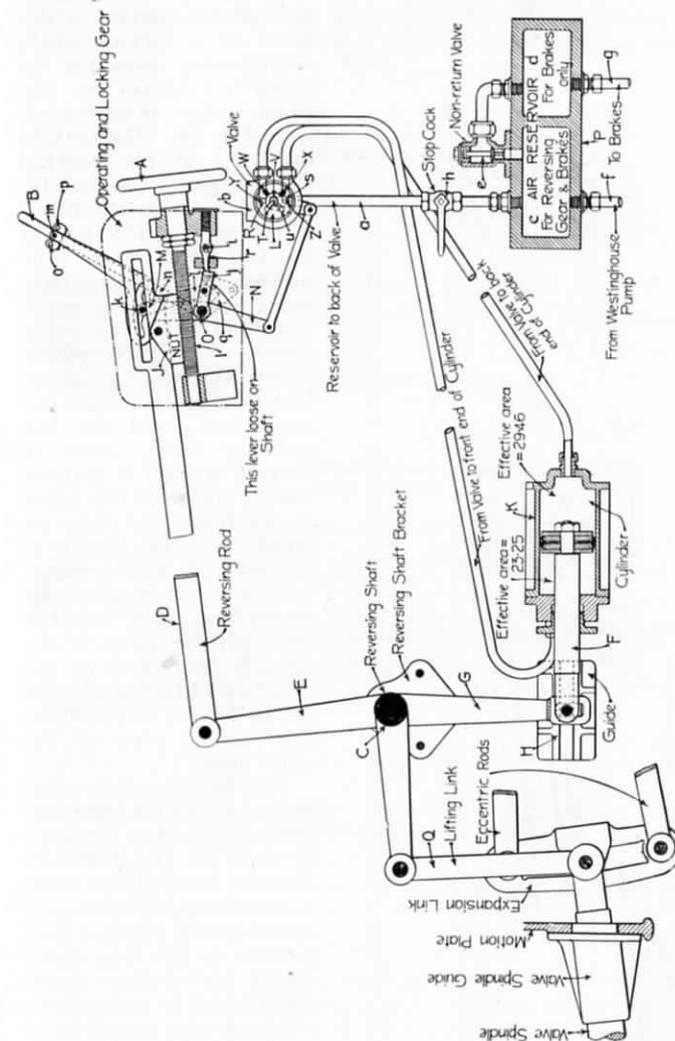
COMPRESSED-AIR REVERSING GEAR, L.N.E.R. (GREAT EASTERN SECTION).
